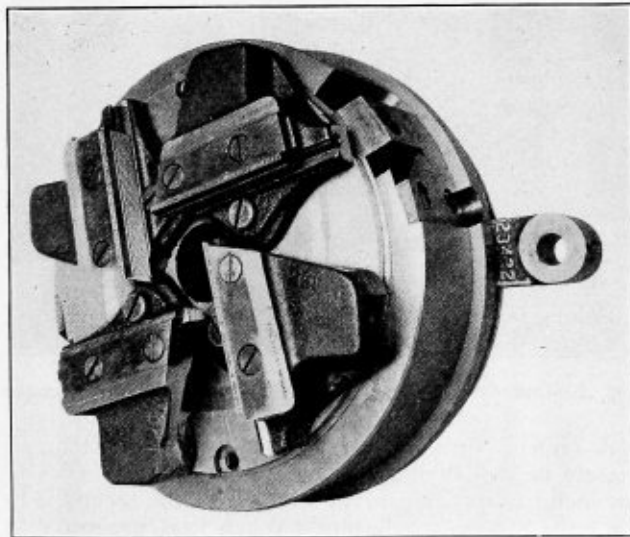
Reverse taper die lead and chasers for cutting threads on staybolts
